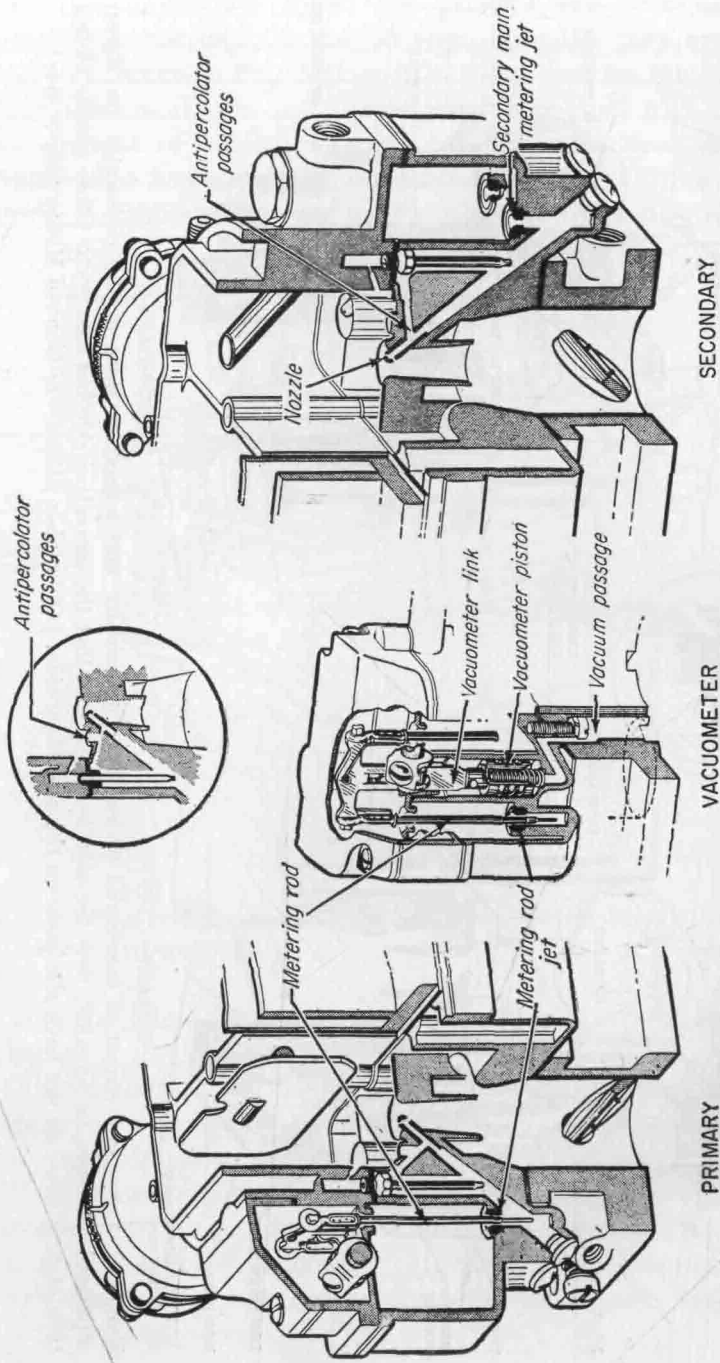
High-speed circuit of four-barrel carburetor. The primary and secondary sides of the carburetor are shown separated although they are actually assembled side by side. The view in the center shows in detail the construction of the vacuumeter full-power circuit. (Oldsmobile Division of General Motors Corporation)
